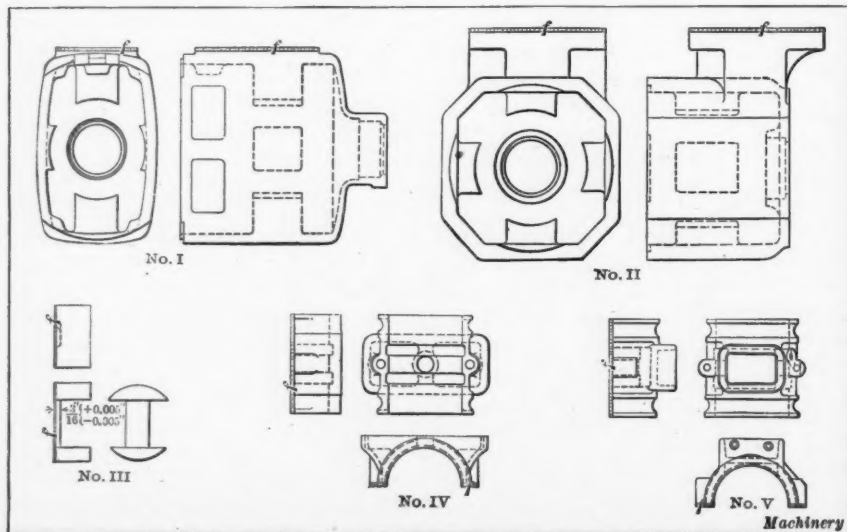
Examples of Automobile Parts that have the Surfaces marked *f* machined on the Rotary Milling Fixtures
